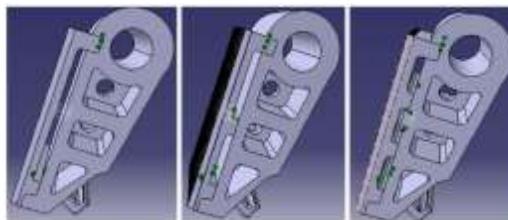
swinging jaw plate with one stiffener, two stiffeners, three stiffeners
